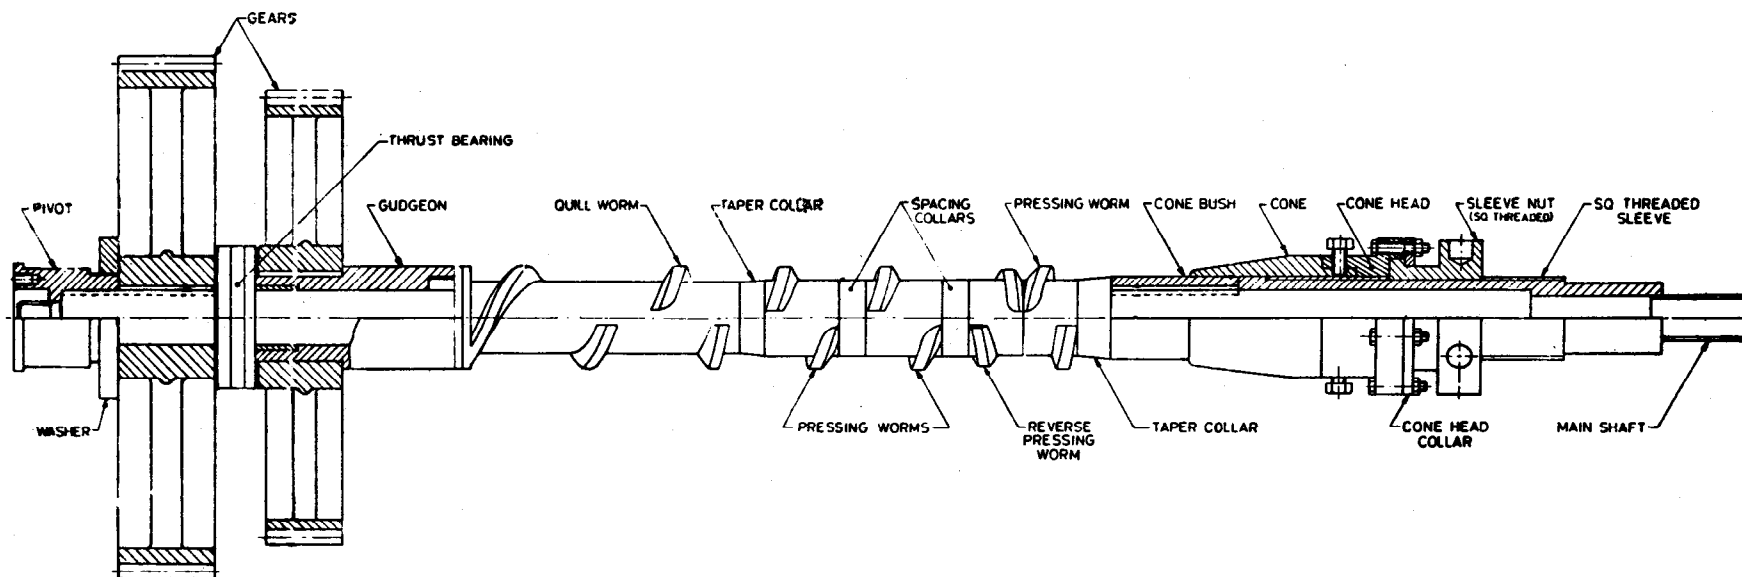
NOMENCLATURE AND ASSEMBLY OF MAIN SHAFT OF DOUBLE GEAR OIL EXPELLER
